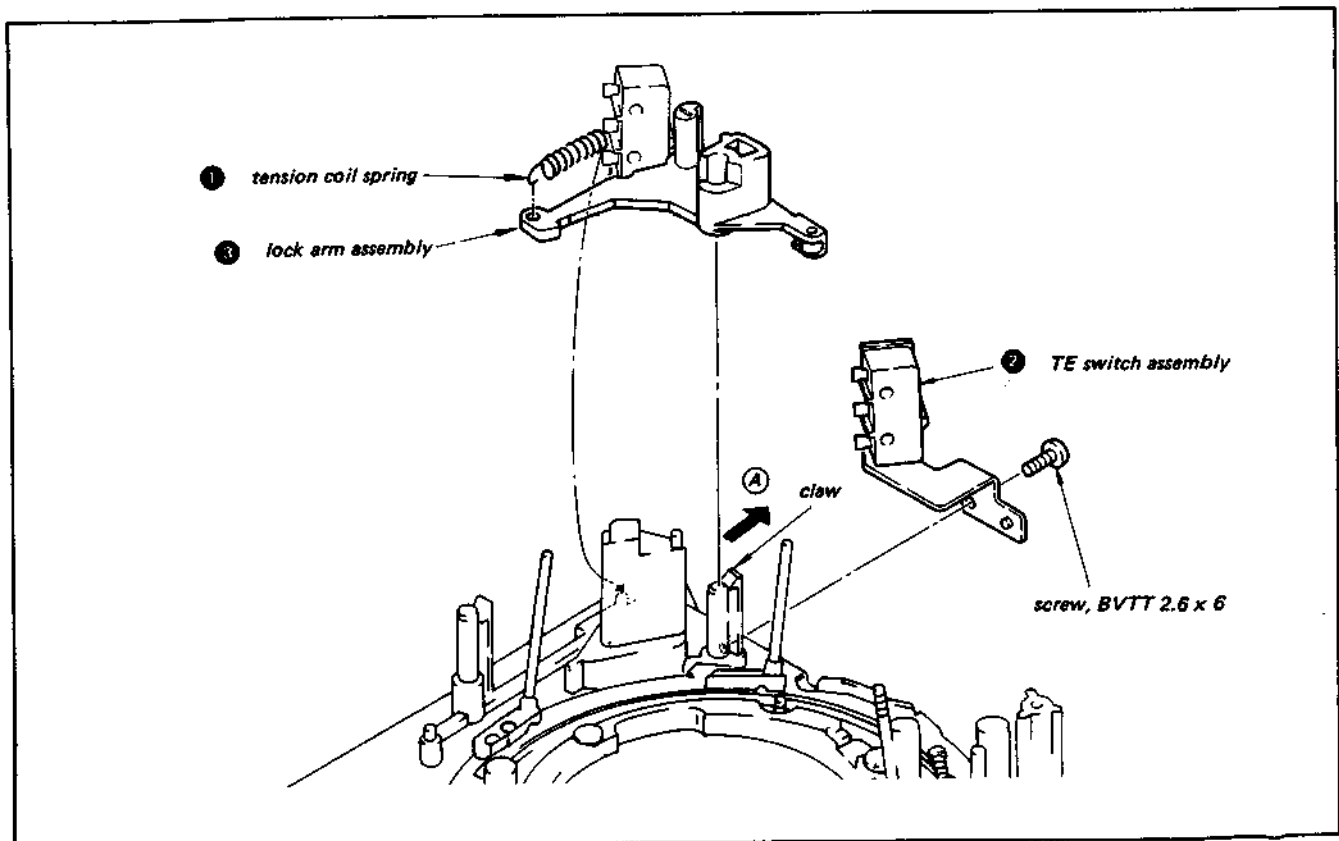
Removal of the TE switch assembly and lock arm assembly
